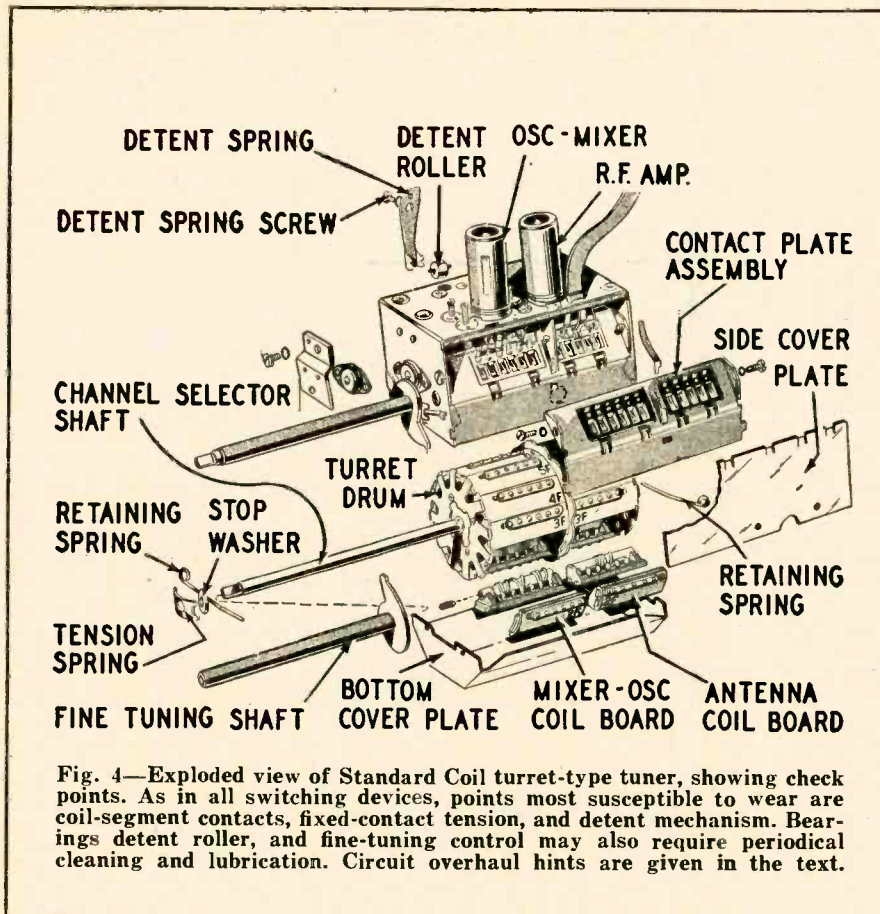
Exploded view of Standard Coil turret-type tuner, showing check points. As in all switching devices, points most susceptible to wear are coil-segment contacts, fixed-contact tension, and detent mechanism. Bearings detent roller, and fine-tuning control may also require periodical cleaning and lubrication. Circuit overhaul hints are given in the text.
